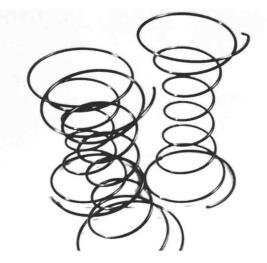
Coil springs with widening spirals at each end are called "double coil" springs.
